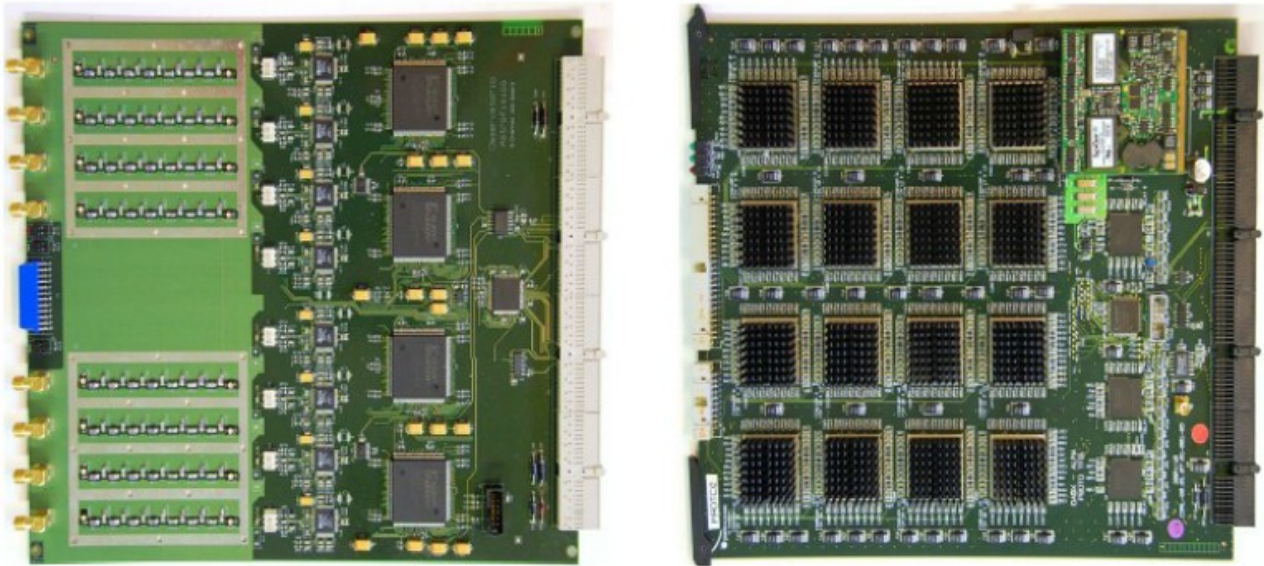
Boards used to make the back end. Left: ADC board, right: FFT board
